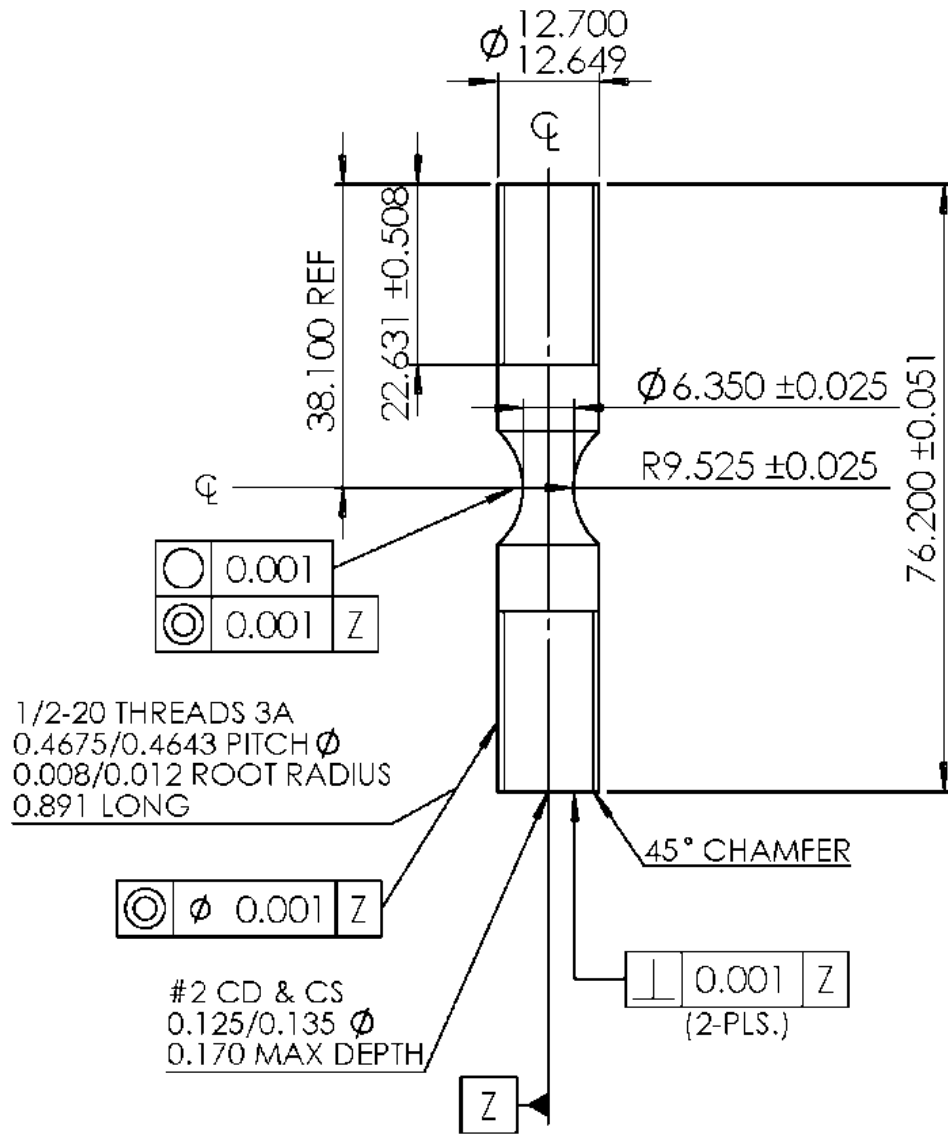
Geometry and dimensions in mm of the large notched bar, R2.
